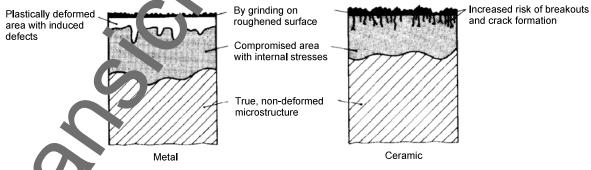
Surface defects in metal and ceramic layers [8].
